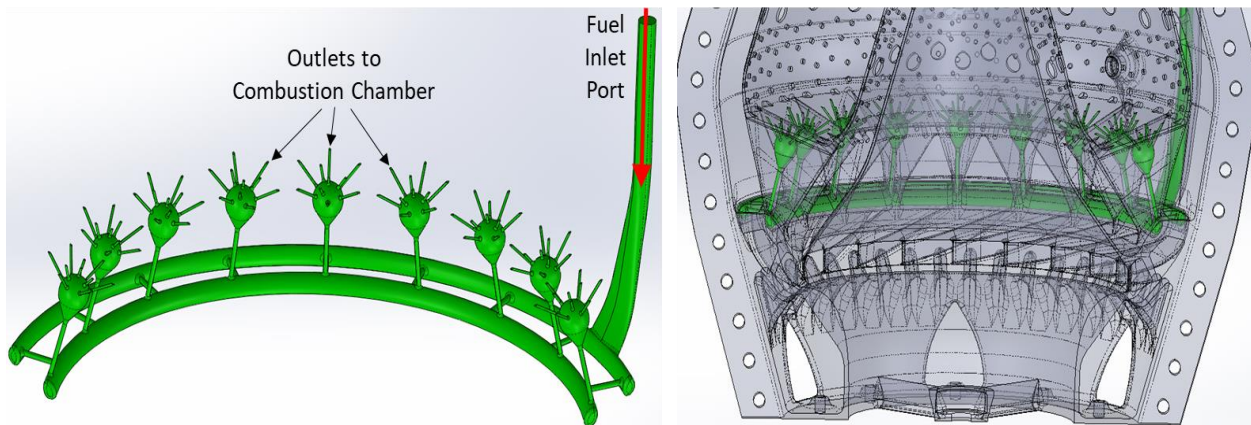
Fuel Manifold Geometry (Left) and Location in Engine Housing (Right)
